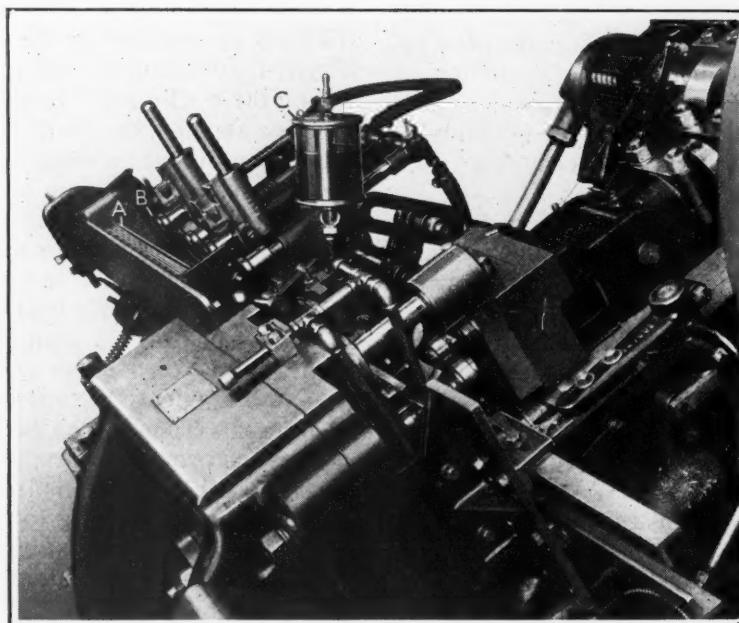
Machine that Blanks out Car Wheels at the Rate of 225,000 per Day
